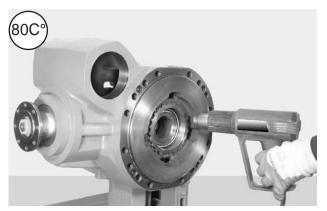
Only if removing or adjusting, uniformly heat the ring nuts up to a temperature of 176 °F [80 °C].
